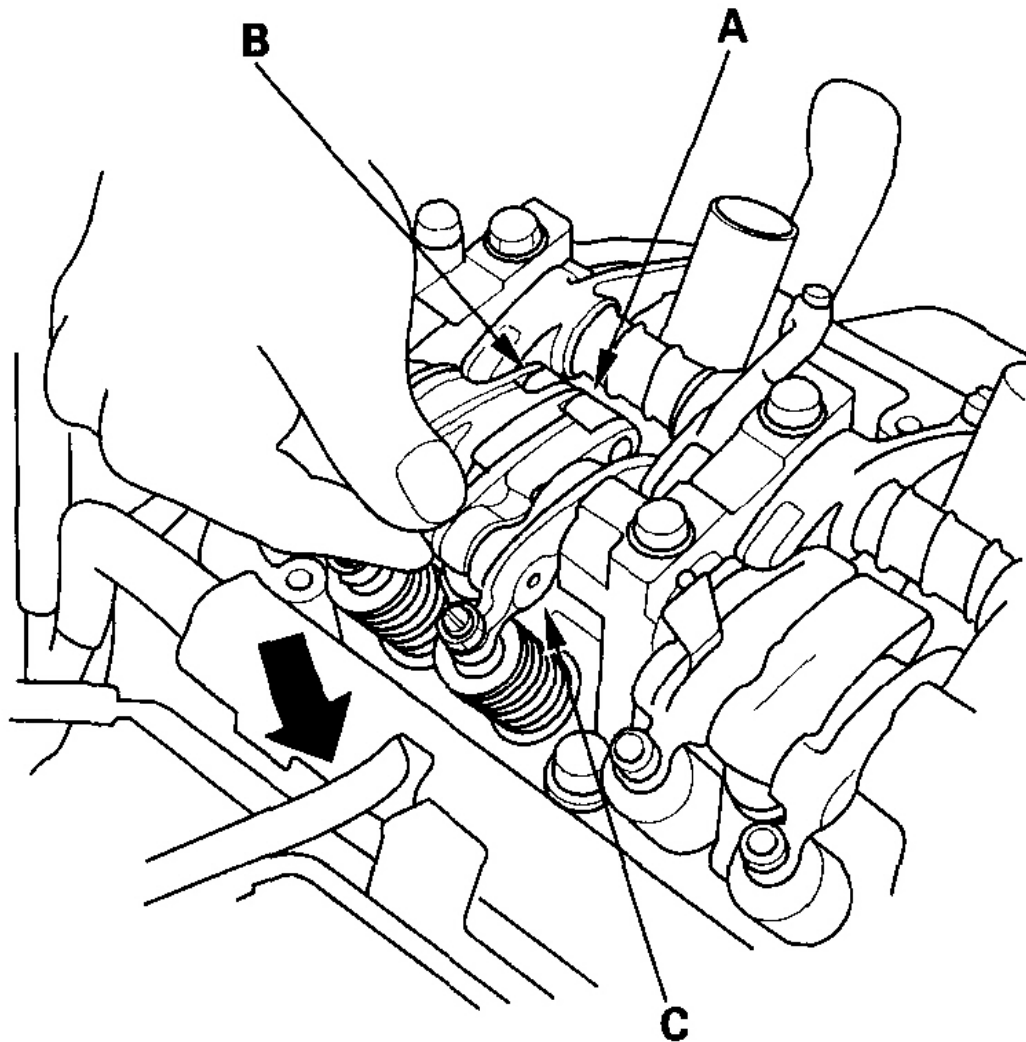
Pushing VTEC Solenoid Valve With Finger
